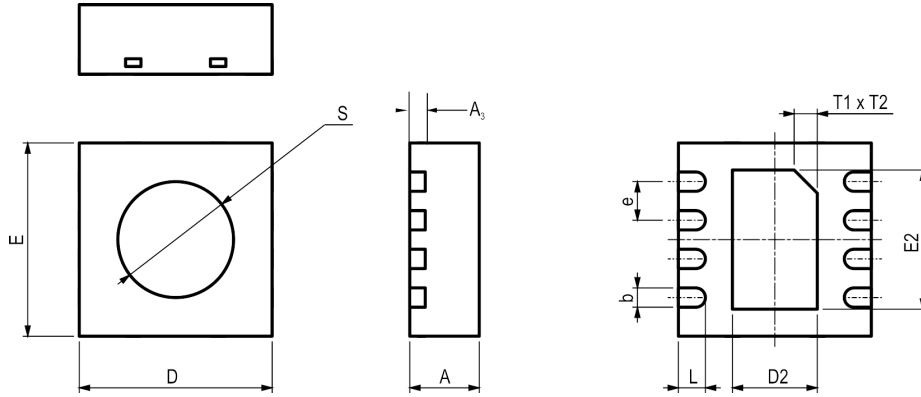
Dimensional drawing of SHT3x-DIS sensor package
